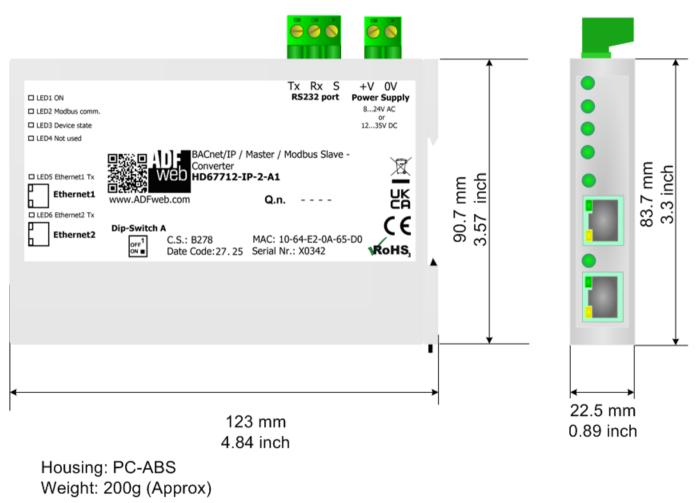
Mechanical dimensions scheme for HD67712-IP-2-A1
